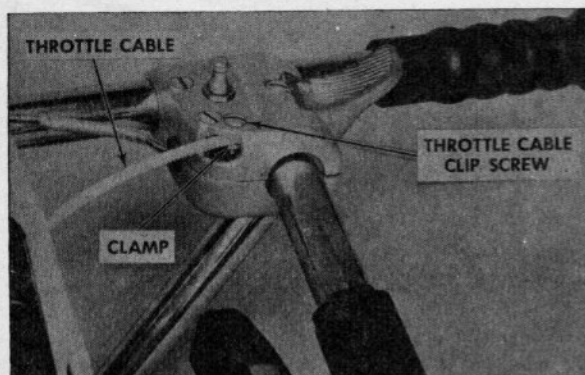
Engine maximum governed speed is adjustable by loosening throttle cable clip screw and moving cable housing away from or towards throttle trigger.
